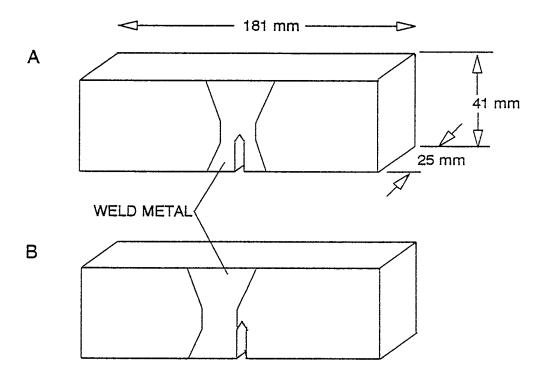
Sketch of the Dynamic Tear Weld Specimens
